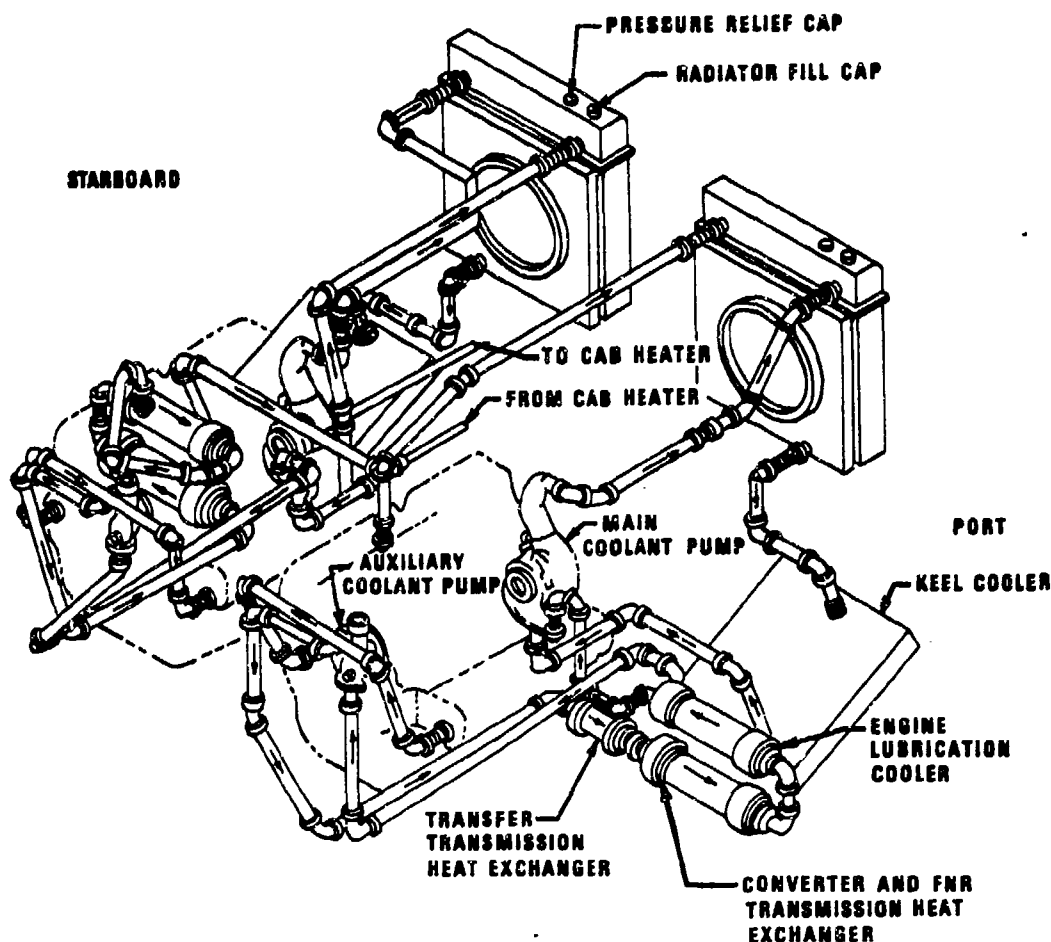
LARC-XV-49 Self-propelled Amphibious Lighter, Cooling System Schematic Drawing (Ref. 15)
